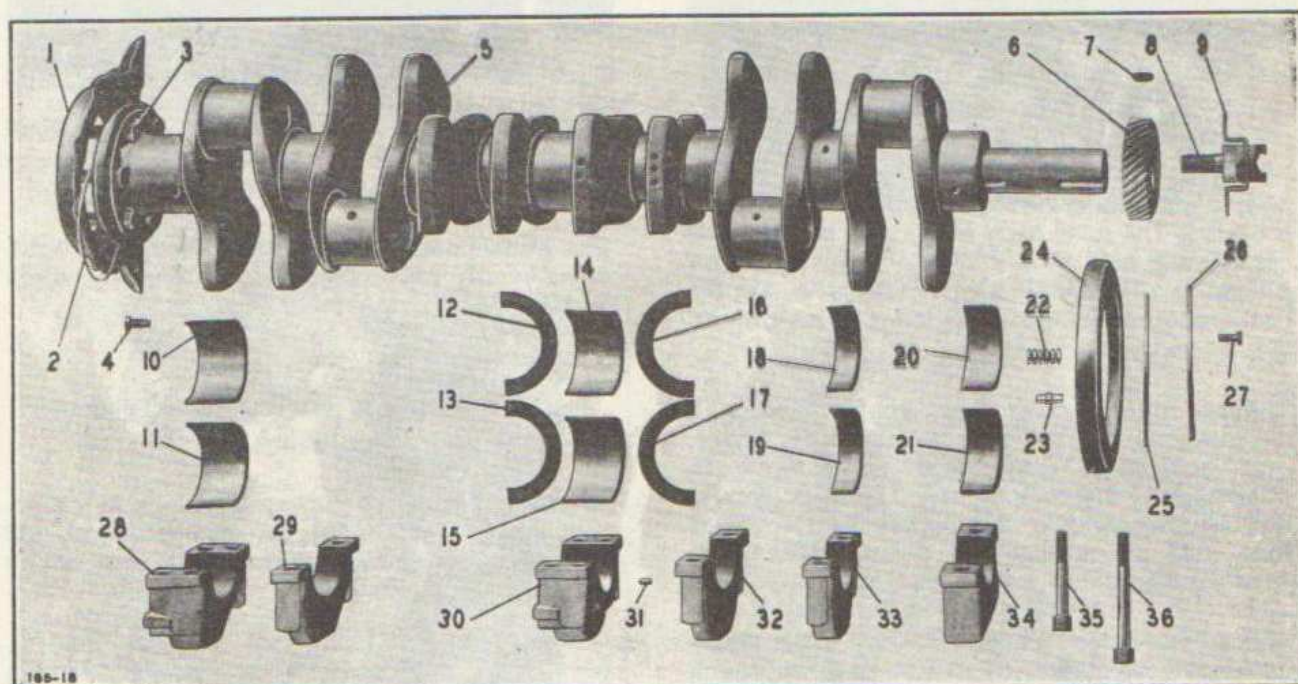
Exploded View of Crankshaft Assembly and Bearings
